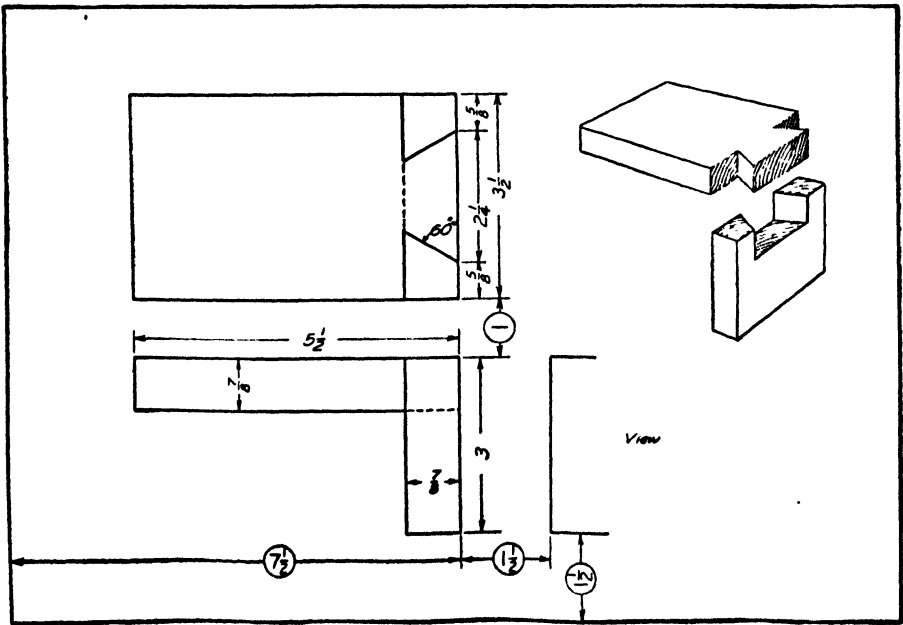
Prob. 118. Draw three complete views of the dovetail joint.
